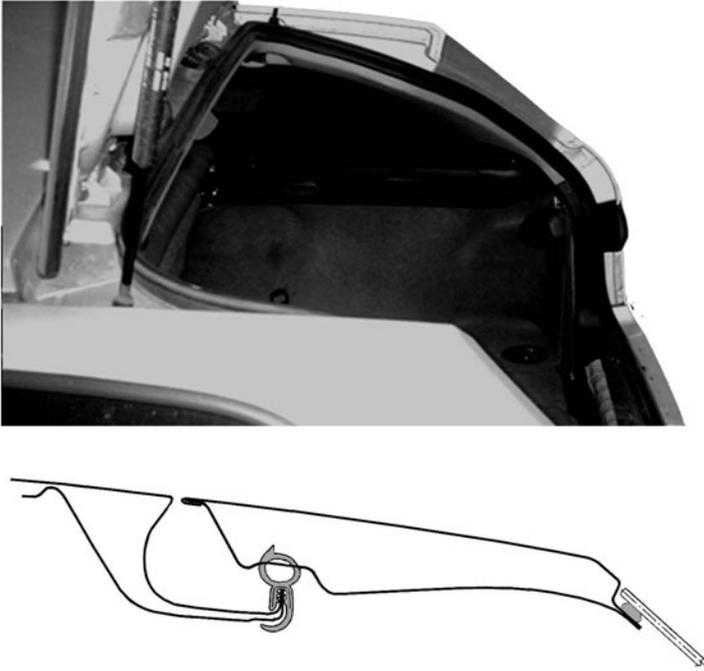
Example of a cut forward liftgate opening. Below, mid liftgate and wide water drain channel section.
